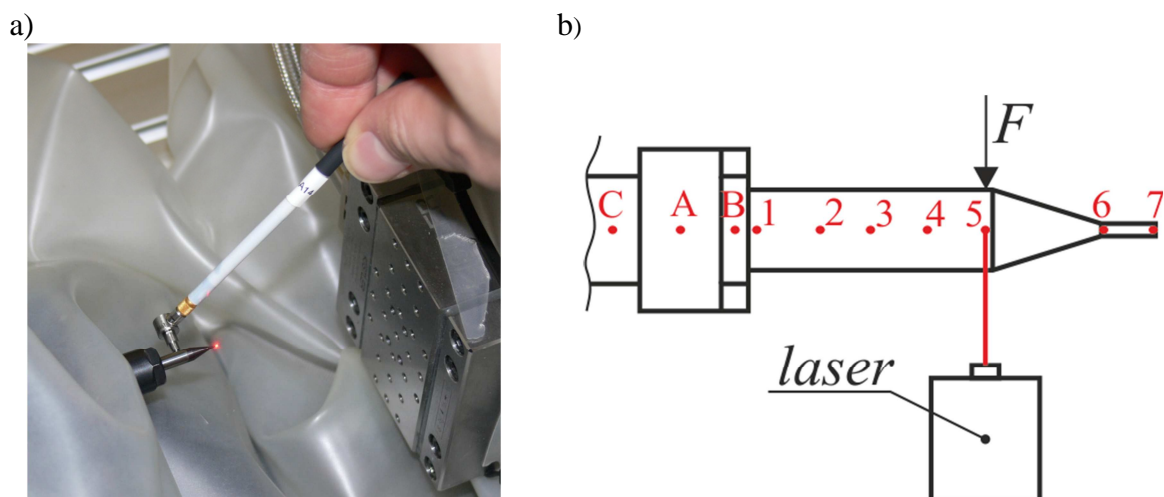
Tool impact test: a) view of impulse force hammer and tool, b) scheme of measurement points
